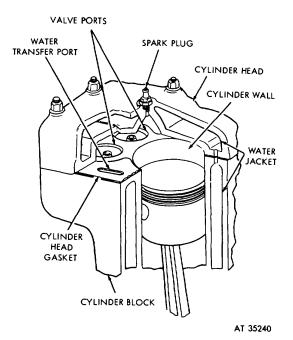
Liquid and gas joints in cylinder head gasket.
